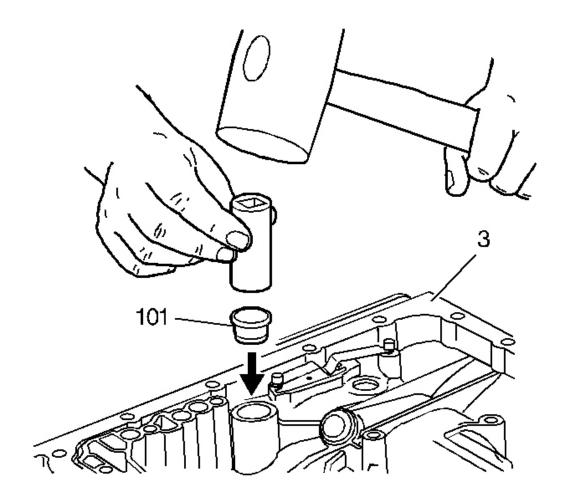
Installing Oil Filter Seal Assembly Courtesy of GENERAL MOTORS CORP.
